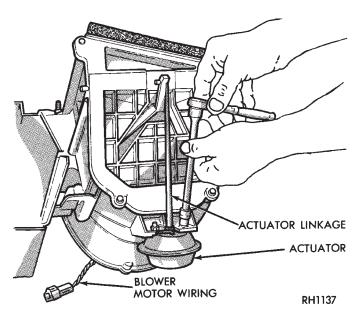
Removing or Installing Fresh/Recirc Vacuum Actuator and Linkage
